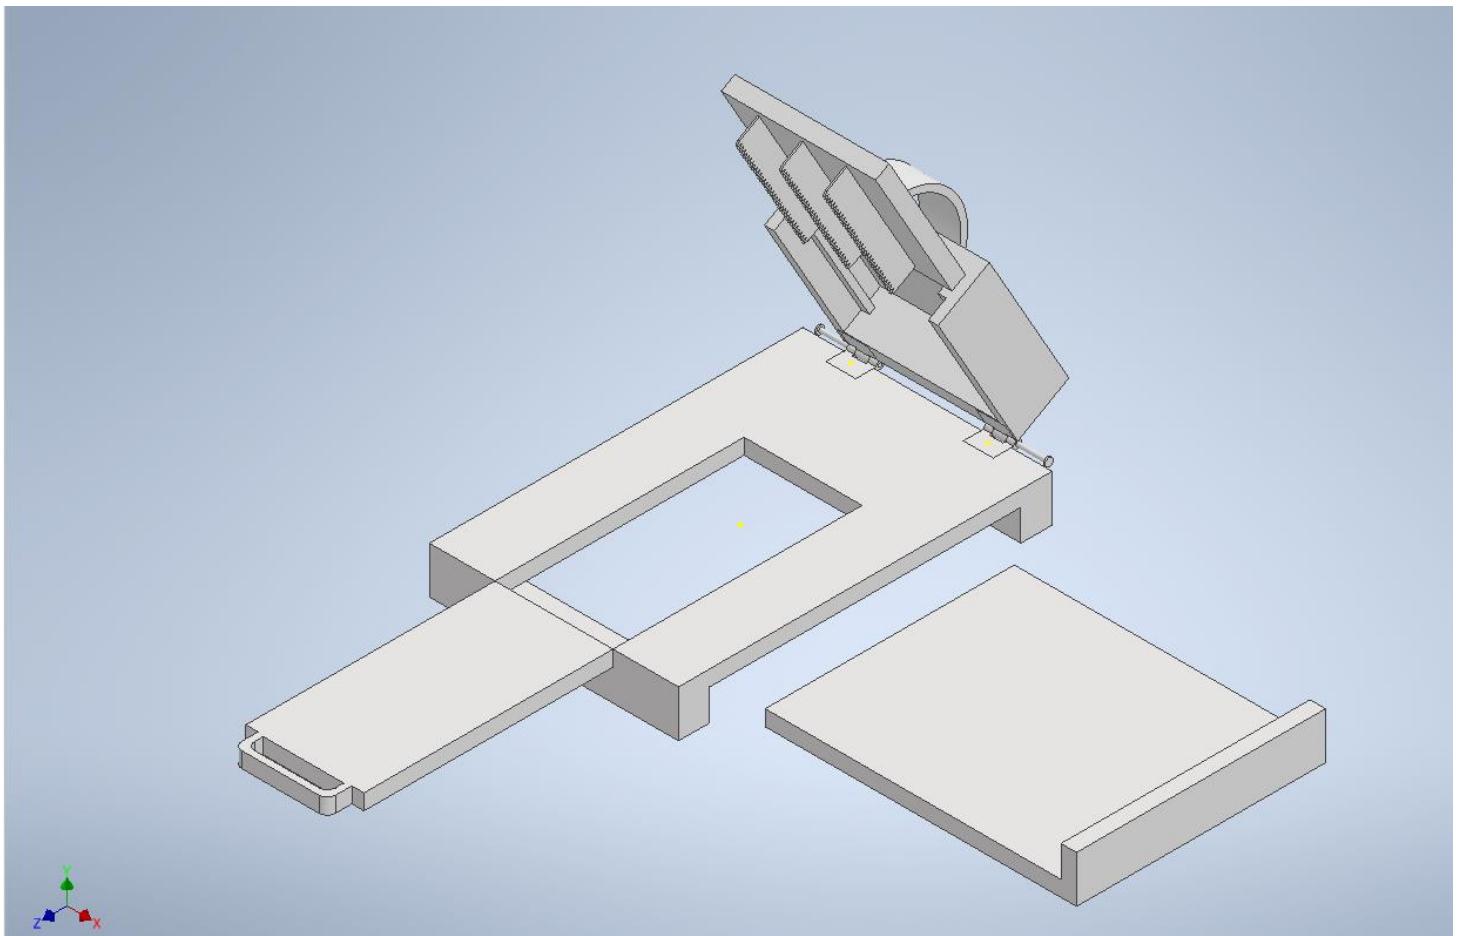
CAD model of Final Refined Prototype with Detachable Components removed
